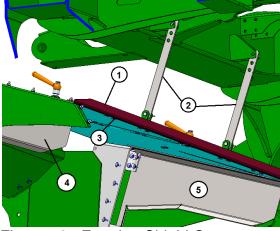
Forming Shield Components Key 1 – Rear Support Key 2 – Links Key 3 – Hardware Key 4 – LH Shield Key 5 – RH Shield
